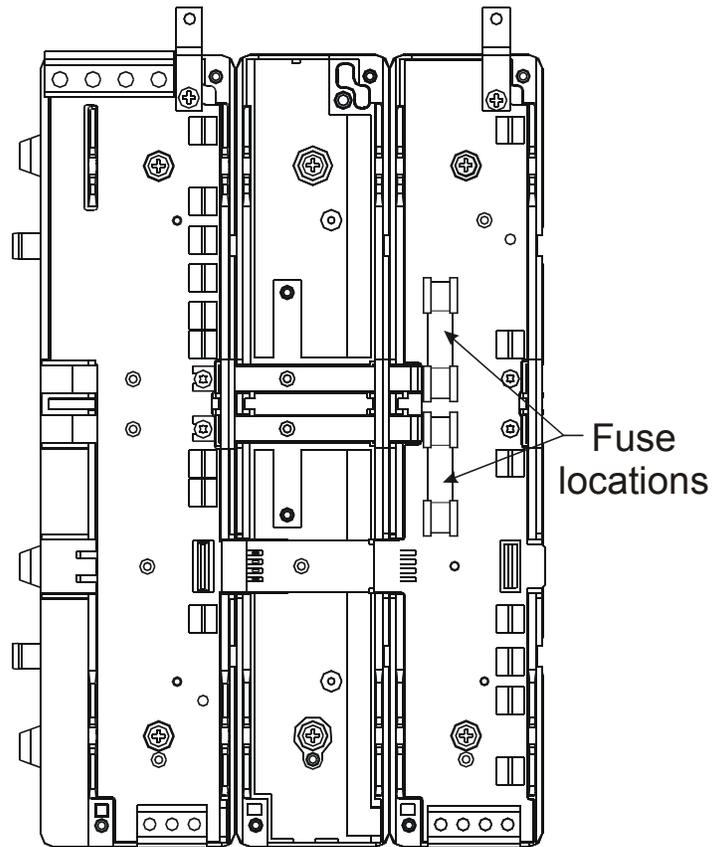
Fuse Location in a Drive Module Backplane - MP-2500/MD-434 Shown
